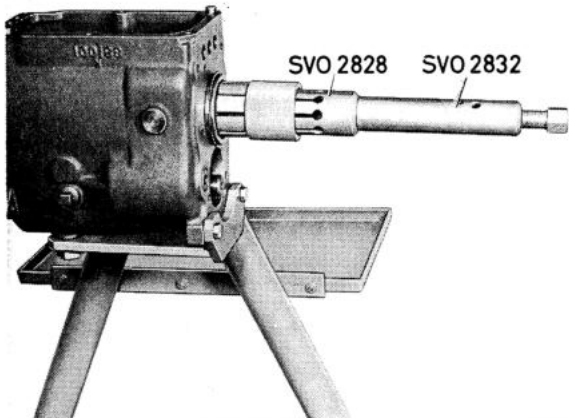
Removing the mainshaft rear bearing, M 410
